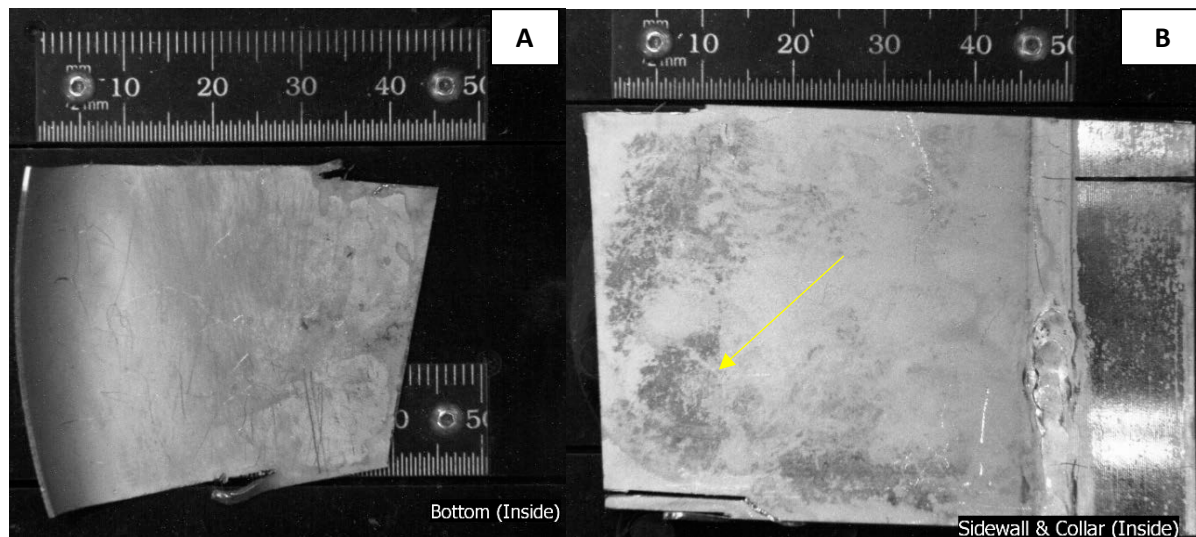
Images showing the inside surface of the bottom (Specimen 2) (A) and the inside surface of sidewall (Specimen 3) (B) of the XBPS333 Hagan after cleaning.
